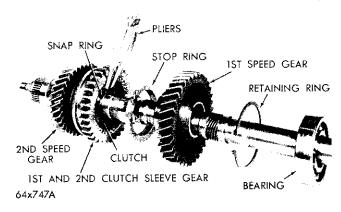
Removing or Installing Clutch Gear Snap Ring
